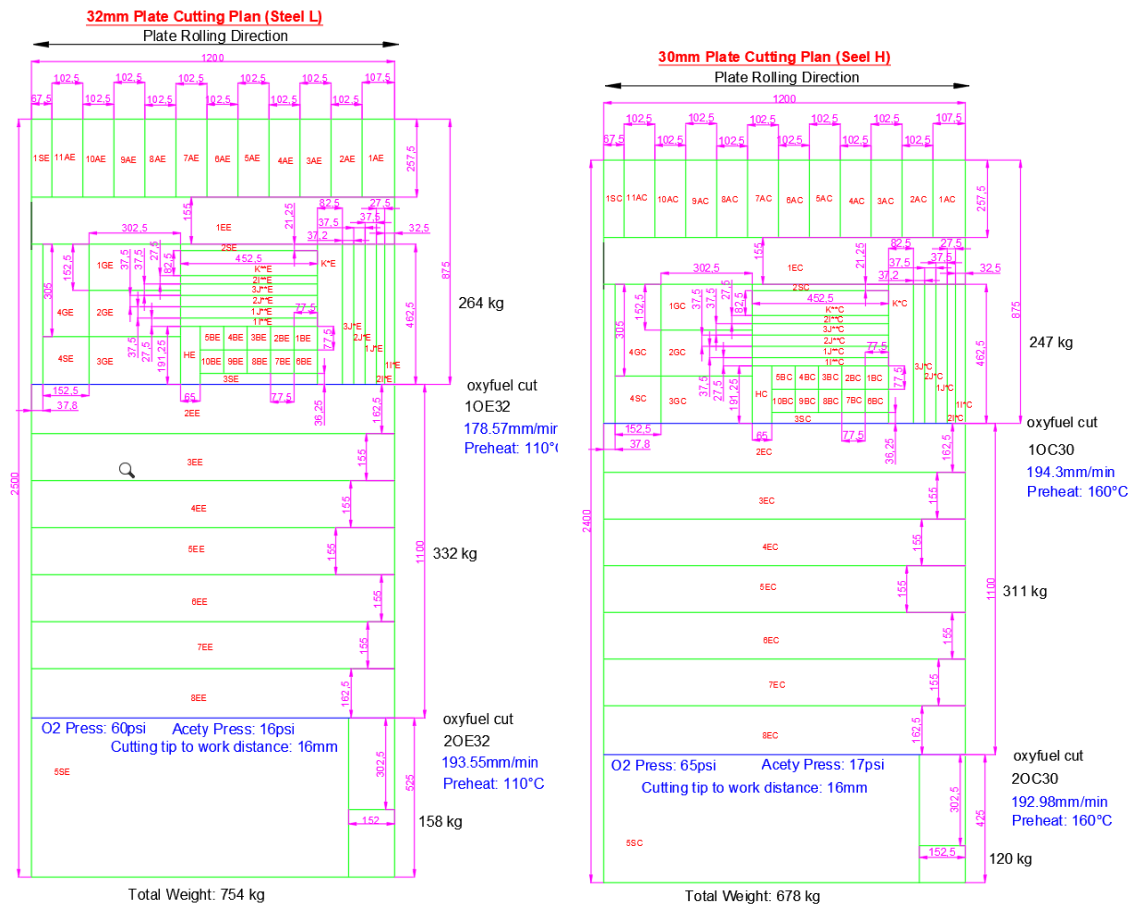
Cutting layout 32mm Plate Steel L and 30mm Plate Steel H.
